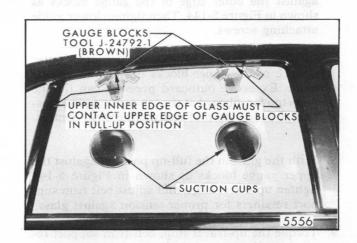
Rear Door Window-In and Out and Up-Travel Alignment - "A-29, 35" Styles
